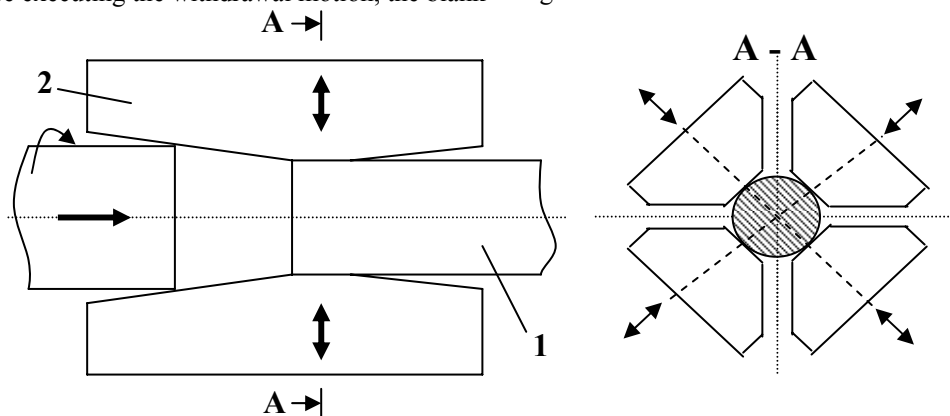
Scheme of radial forging of round blanks with two pairs of tools: 1 – blank; 2 – sledge
